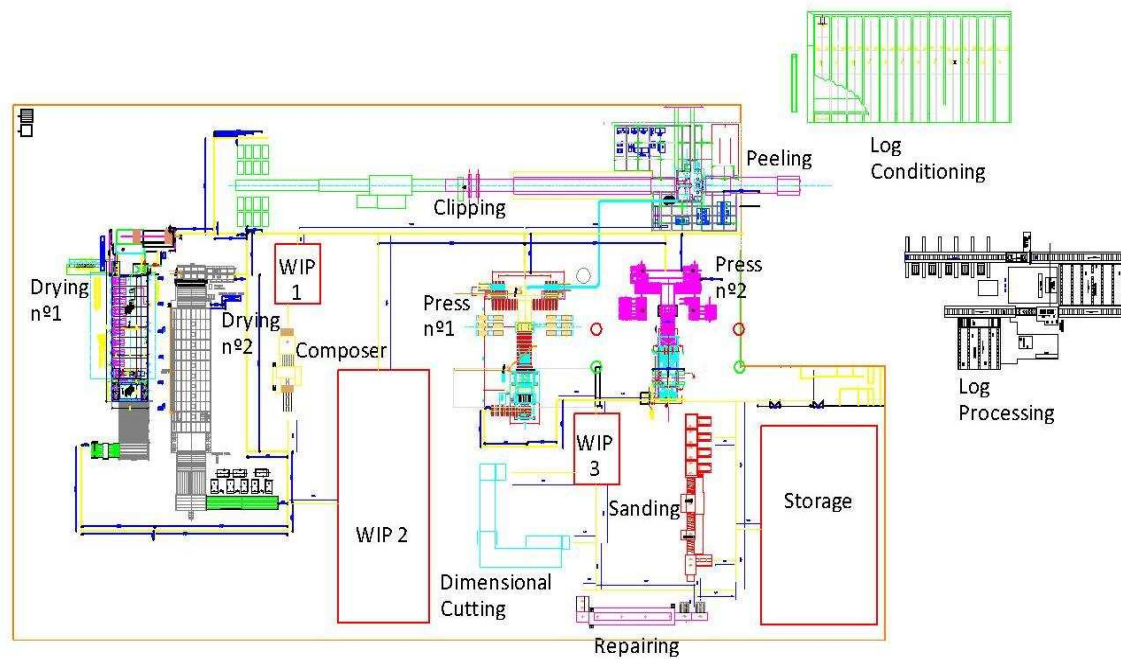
Plant layout alternative 2. *Source (modified):* Urupanel.
